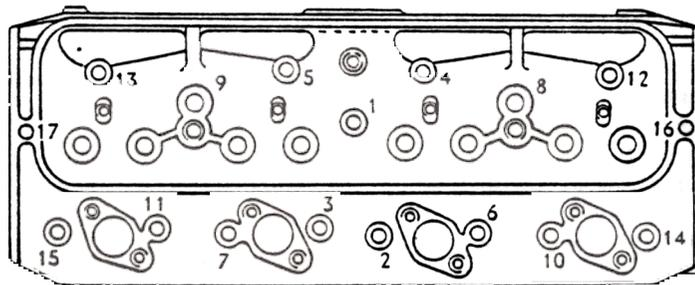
Diagram showing order in which cylinder head nuts must be tightened
